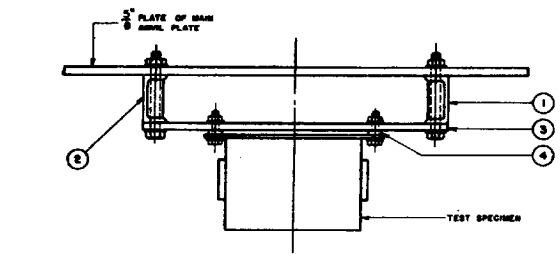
Anvil plate of shock-testing machine for lightweight equipment.
